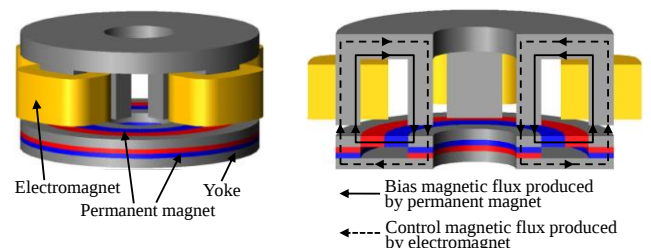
Magnetic bearing of Combined type magnetically levitated motor
